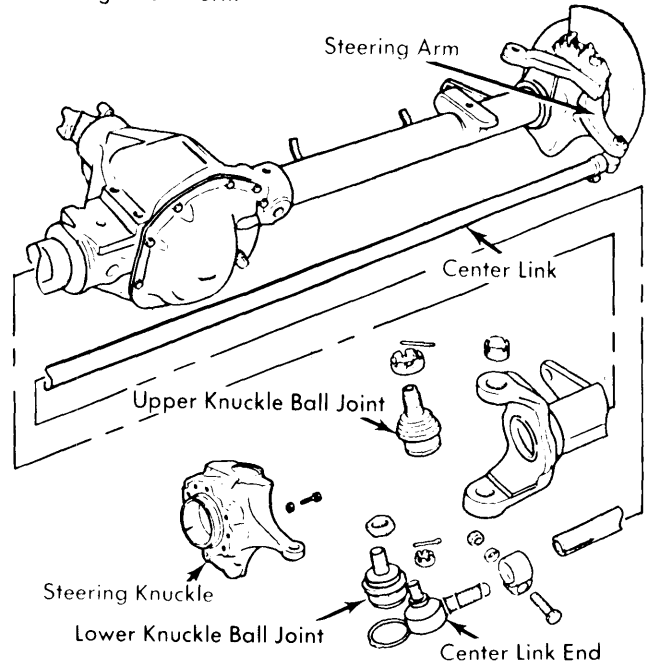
4WD Steering Linkage Assembly (W100 is Model Shown)
